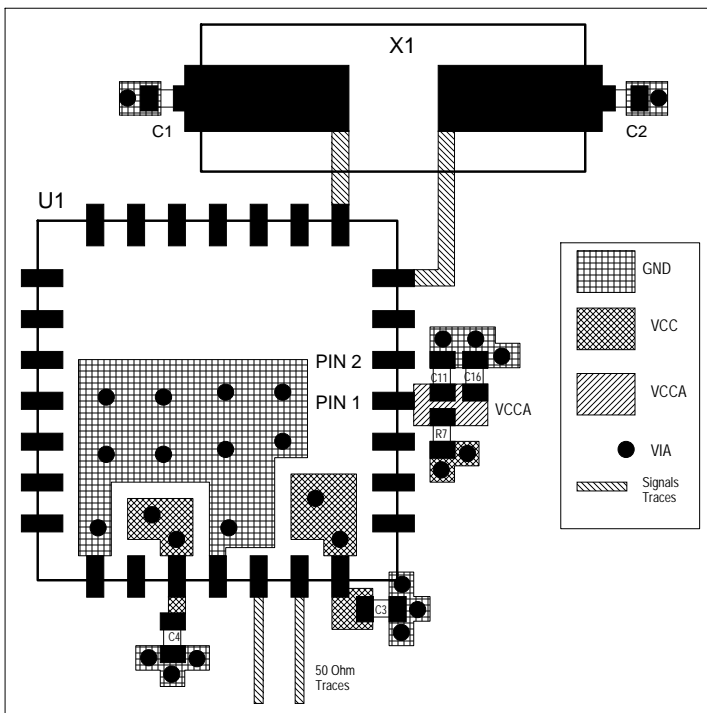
B. ICS84330CI PCB Board Layout for ICS84330CI
